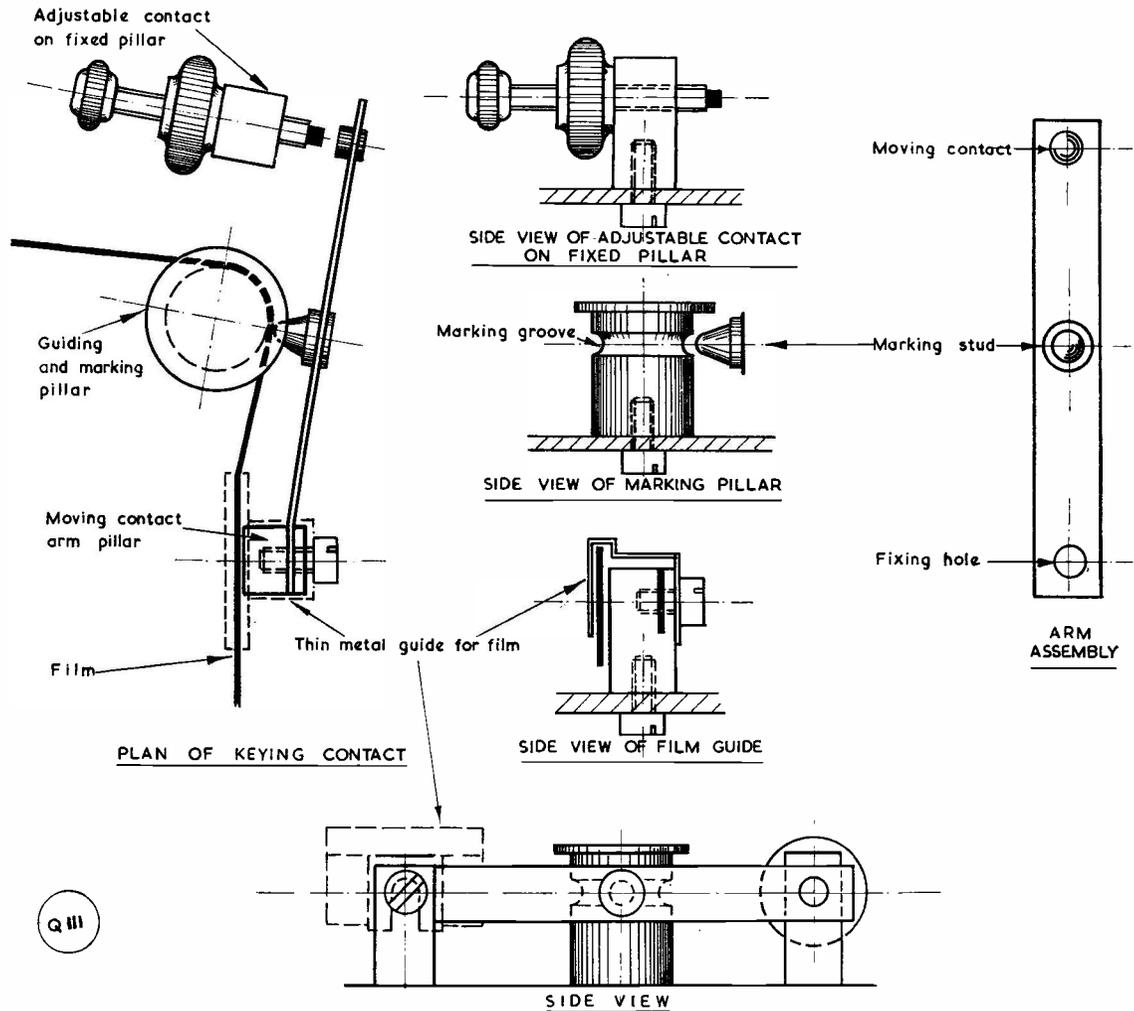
Arrangement of the keying head, showing how the marking pillar is grooved and the tip of the marking stud rounded to give positive make-and-break at the keying contact; this groove, and the rounding of the marker stud, may be a matter for adjustment, the aim being to obtain sufficient "throw" on the keying arm with no tendency for the marker stud to catch in the tape perforations.
